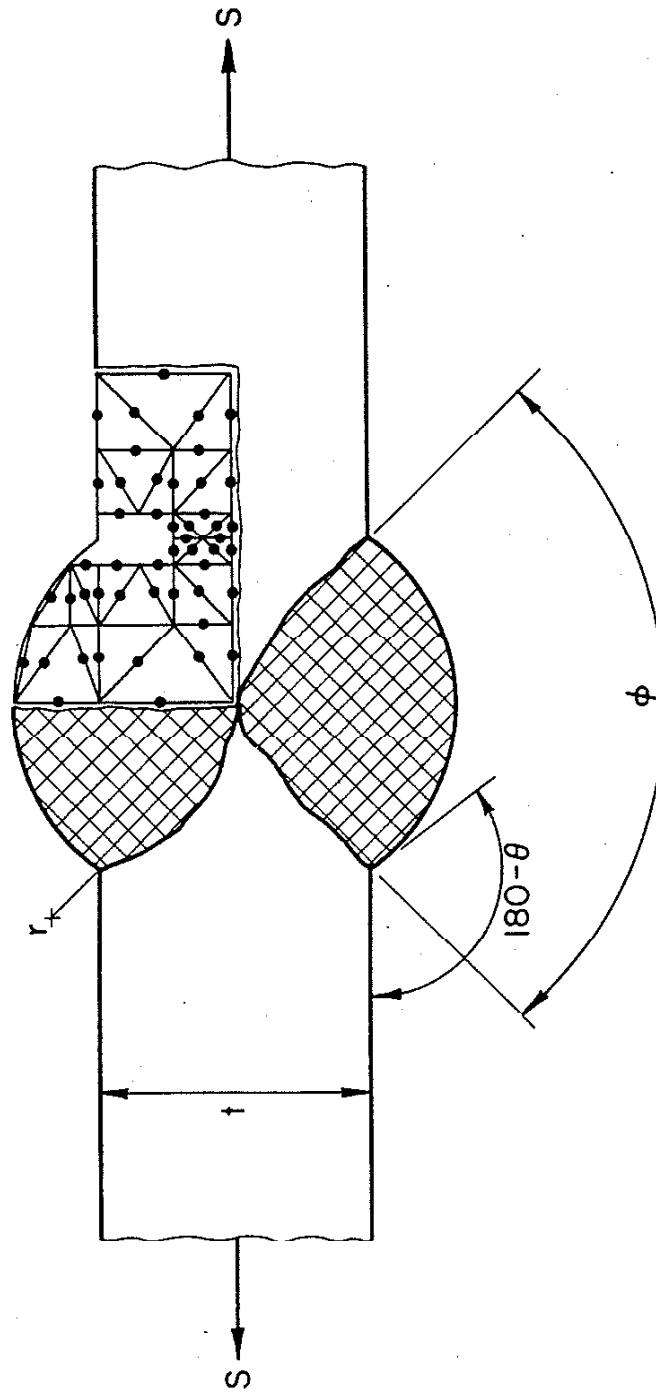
Parameters describing the shape of a double-V butt weldment. Inserted mesh shows the approximation of one quadrant of the weld by finite elements.
